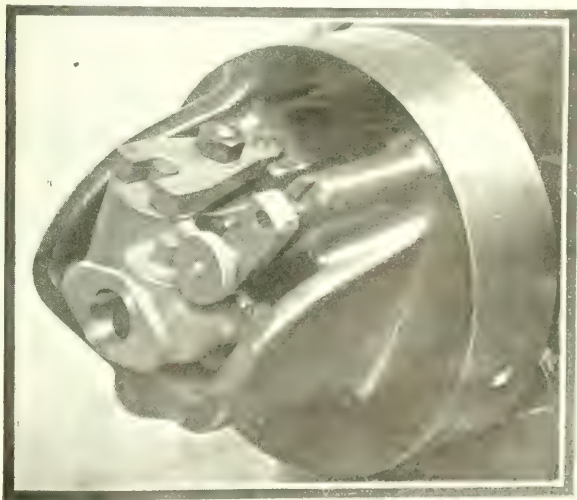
ANGLE PLATE FIXTURE FOR CARBURETOR BODIES
